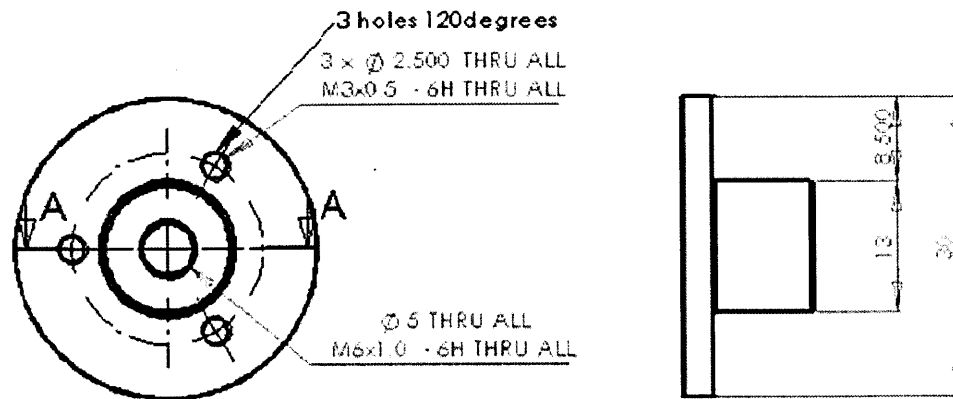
Drawing for the mounting hub discussed in Chapter 4.
